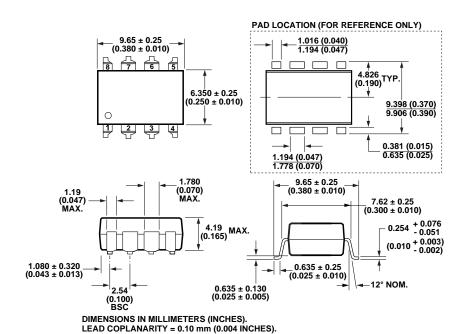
HCPL-4506 Gull Wing Surface Mount Option #300 Outline Drawing.
